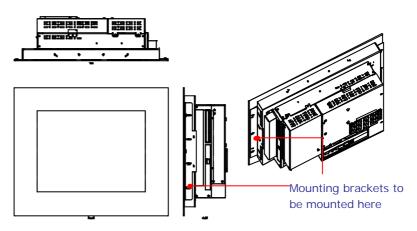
ODYSSE B MOUNTING WITH L-SHAPE MOUNTING BRACKETS
